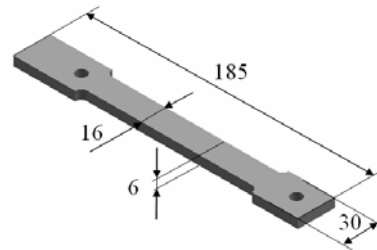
Final shape and dimensions (mm) of the tested specimen
